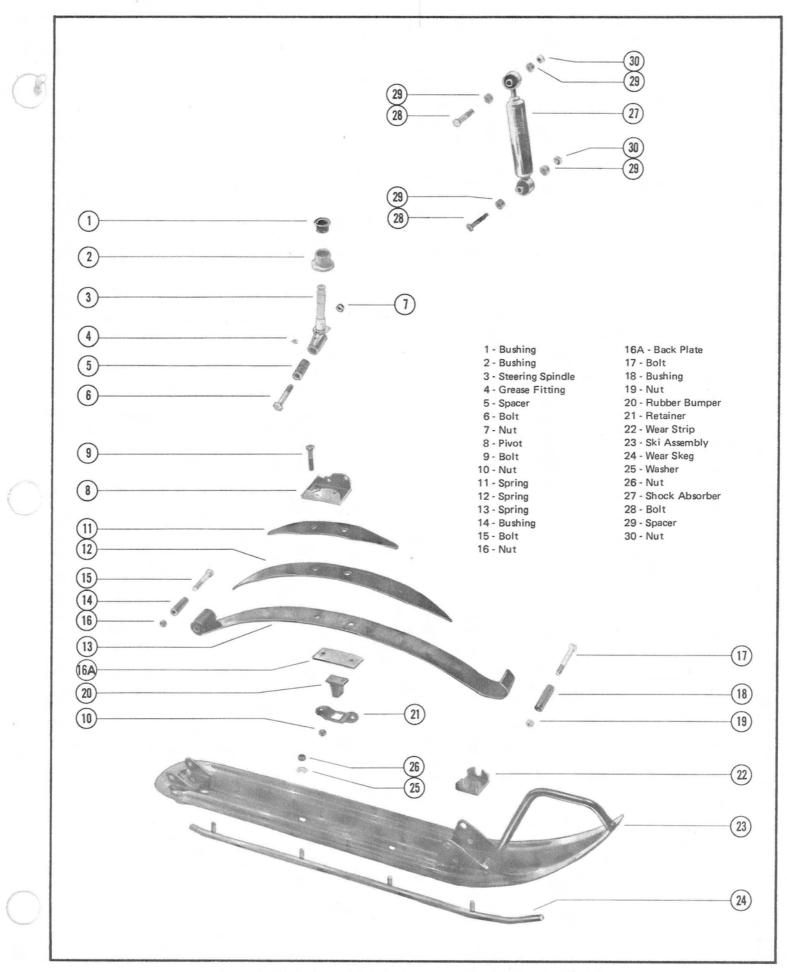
Ski, Spring and Spindle Components for Sno-Twister (400-D)
